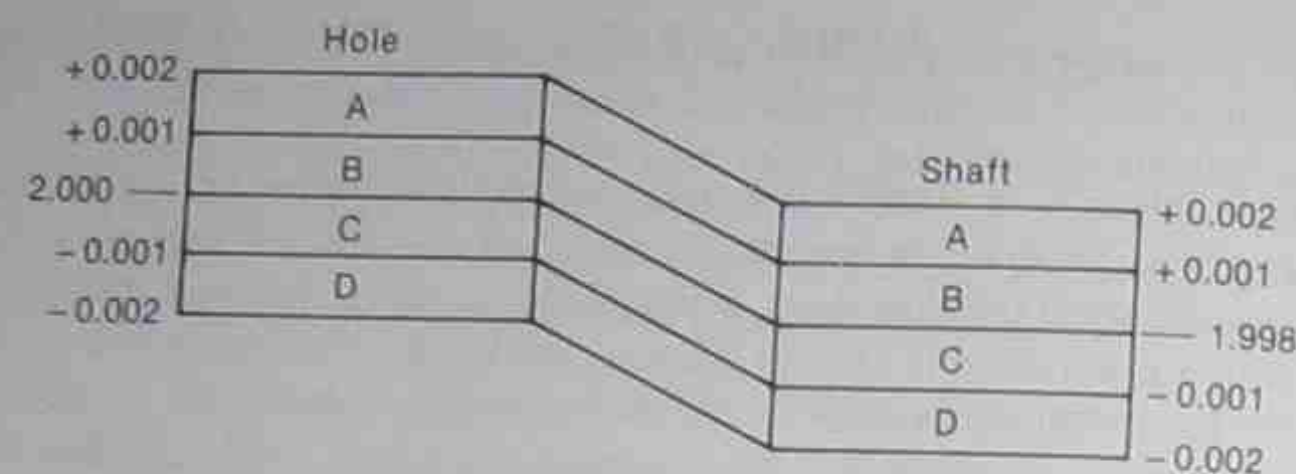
A selective assembly system for combining shafts and holes that insures a desired limit of clearance between any appropriate pair of components.
